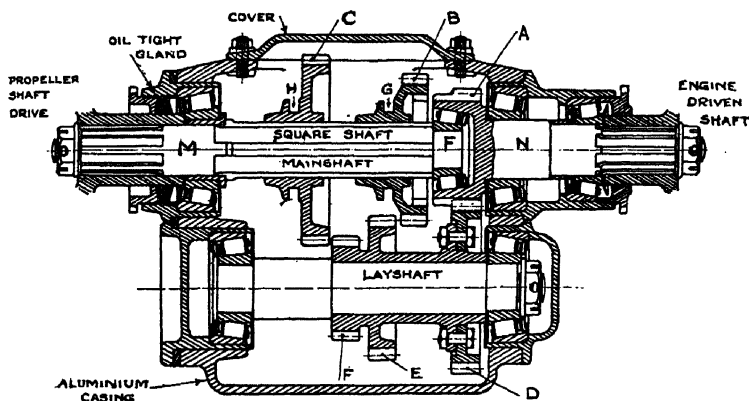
Construction and Working of the ordinary Three-Speed Gearbox.
